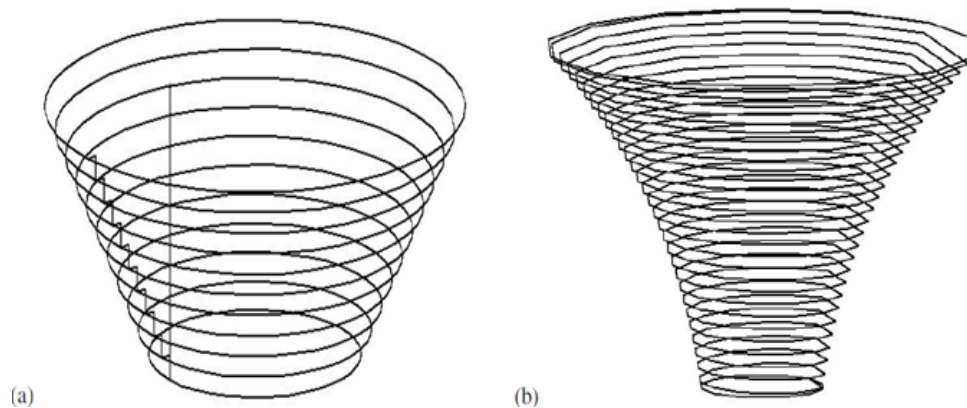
(a) Contour tool path (b) Spiral tool path [21]
